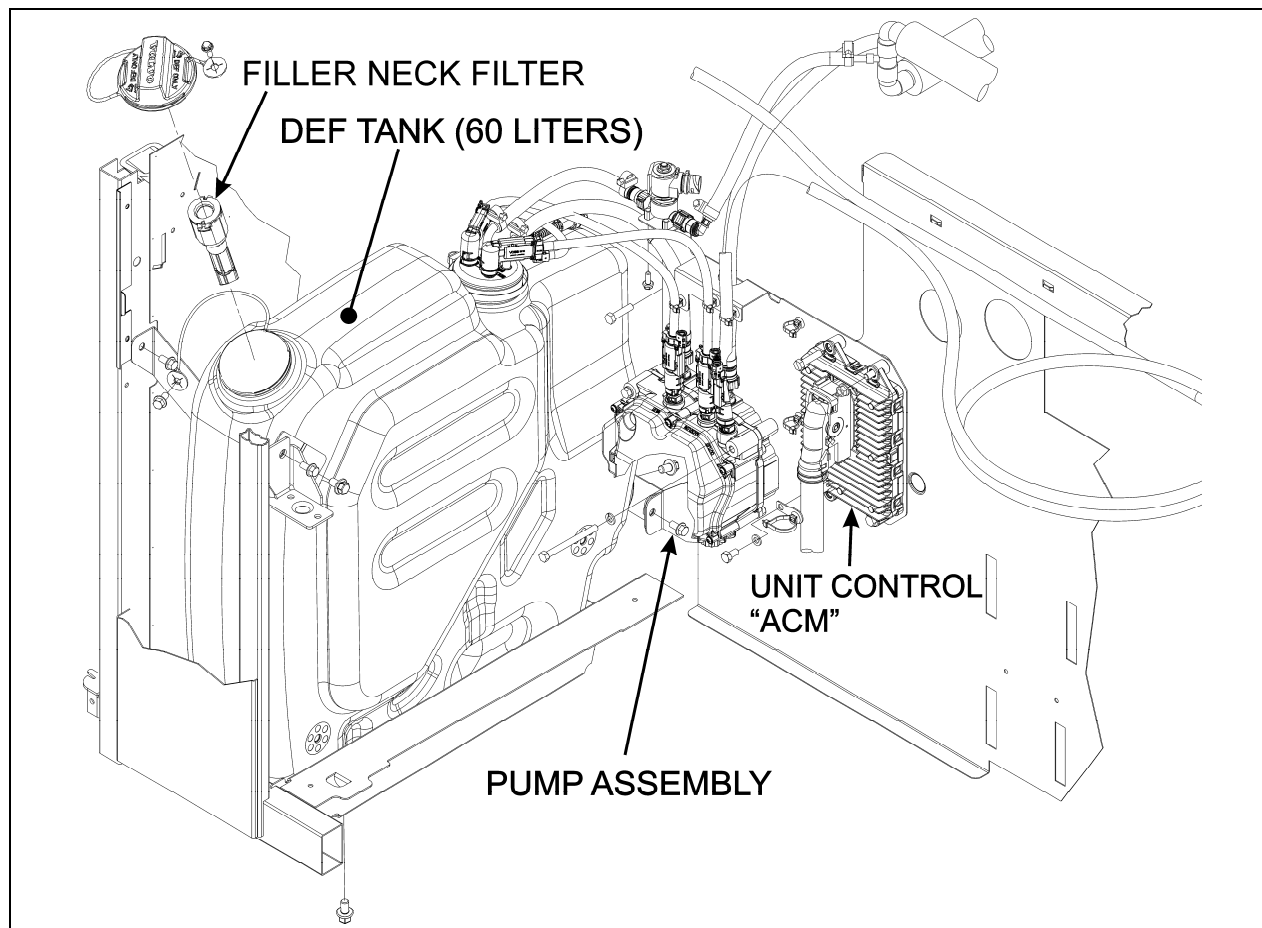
DIESEL EXHAUST FLUID (DEF) TANK AND PUMP ASSEMBLY ARRANGEMENT
